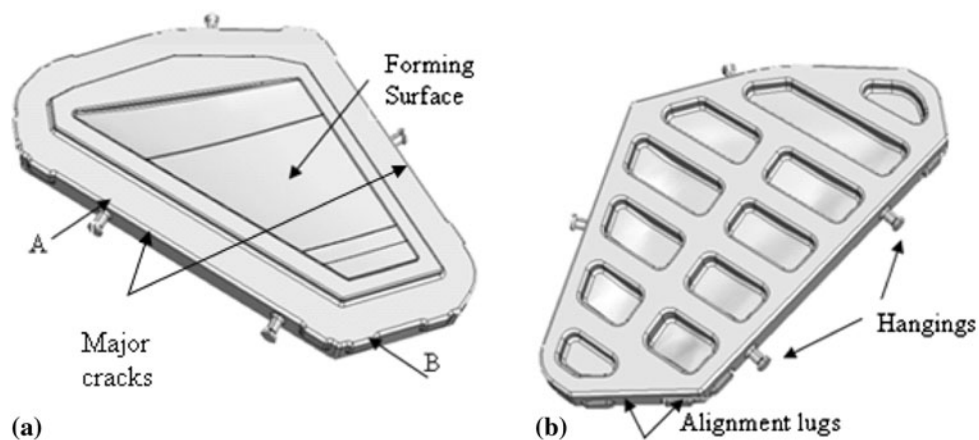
Geometry of realistic superplastic forming tool: (a) top view SPF tool; (b) bottom view of SPF tool
